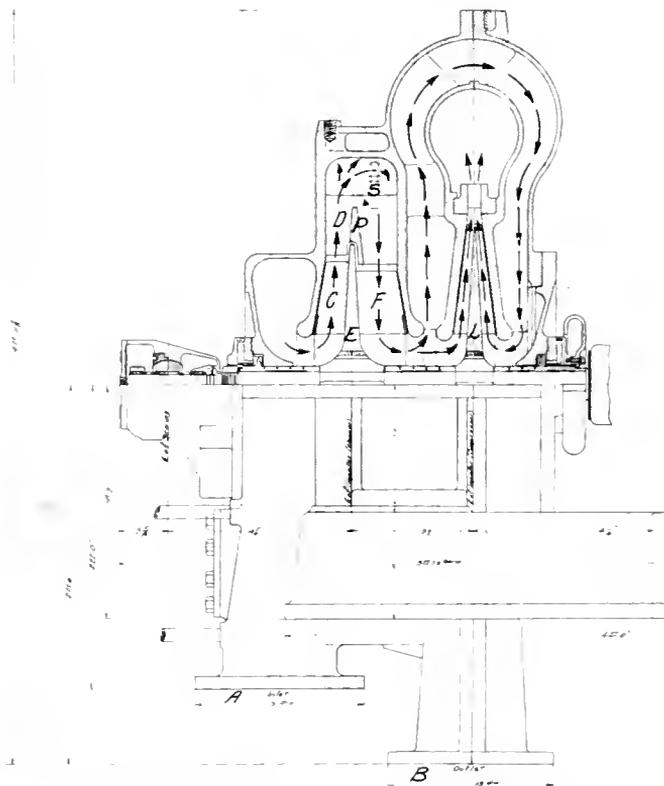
Centrifugal Compressor Arranged for Cleaning Producer Gas
